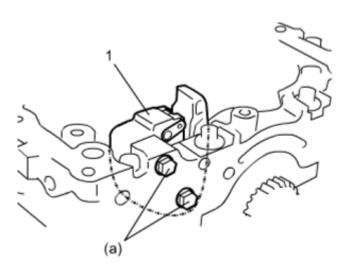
Identifying Oil Pump Chain Adjuster Courtesy of SUZUKI OF AMERICA CORP.
